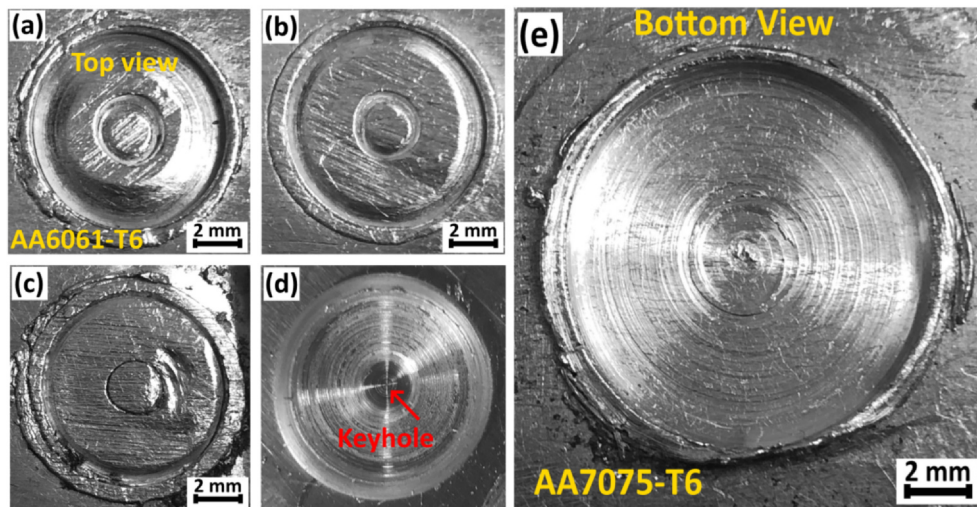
Surface appearance of welds, (a) 6 s, (b) 12 s, (c) 18 s, (d) Conventional FSSW (Top view), (e) Bottom view of MFSC.
